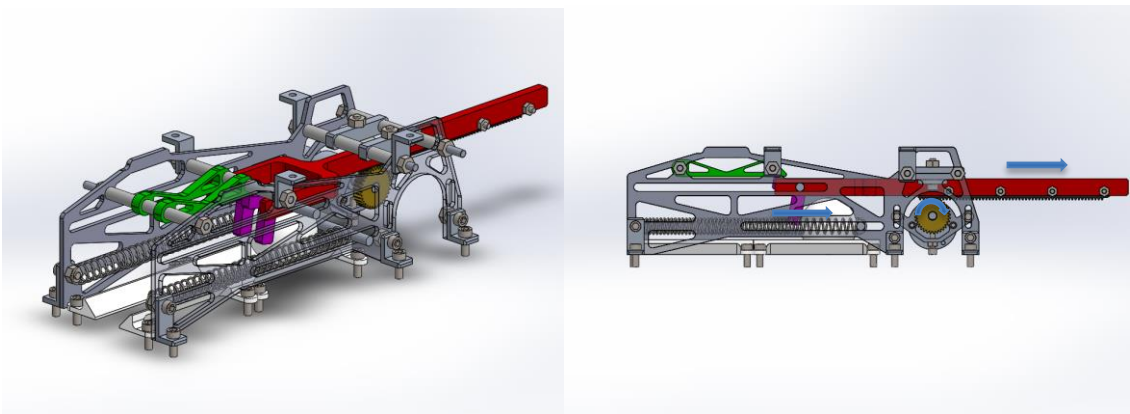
Mechanism about to release golf ball; motor pulling golf ball and springs to the right.
